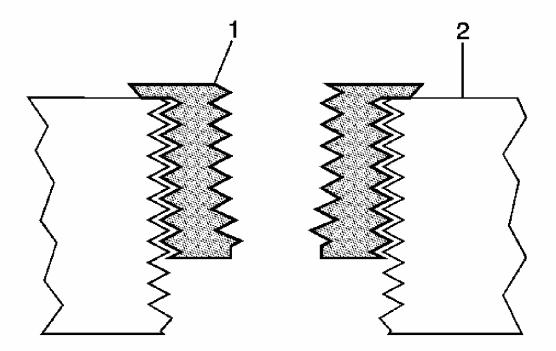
Inspecting Insert For Proper Installation - Tapered Thread Courtesy of GENERAL MOTORS CORP.
